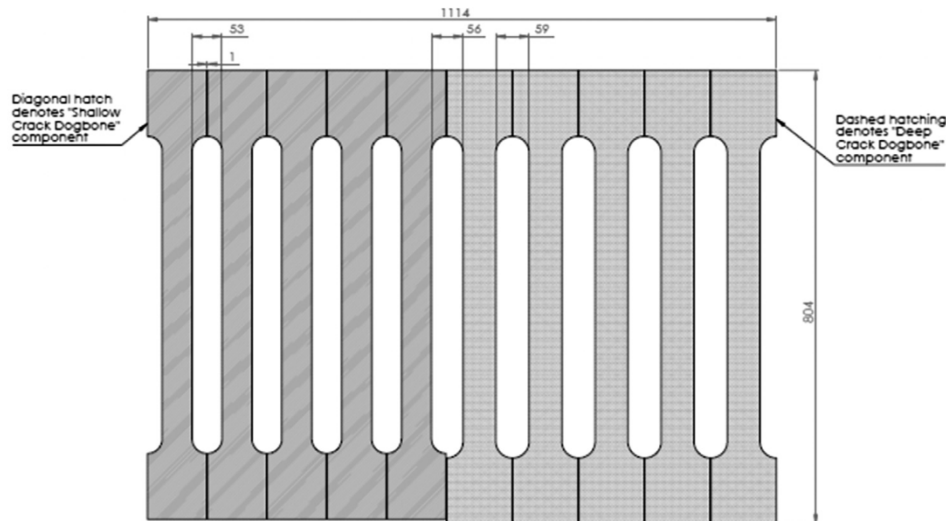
Cut design to produce dog-bone specimens for pre-straining. Insets (white areas) used for SEN(B) specimens of as-received material. Shallow crack refers to dog-bones used for SEN(B) specimens with $a/W = 0.05$; Deep crack refers to dog-bones used for SEN(B) specimens with $a/W = 0.2$ and $a/W = 0.4$.
